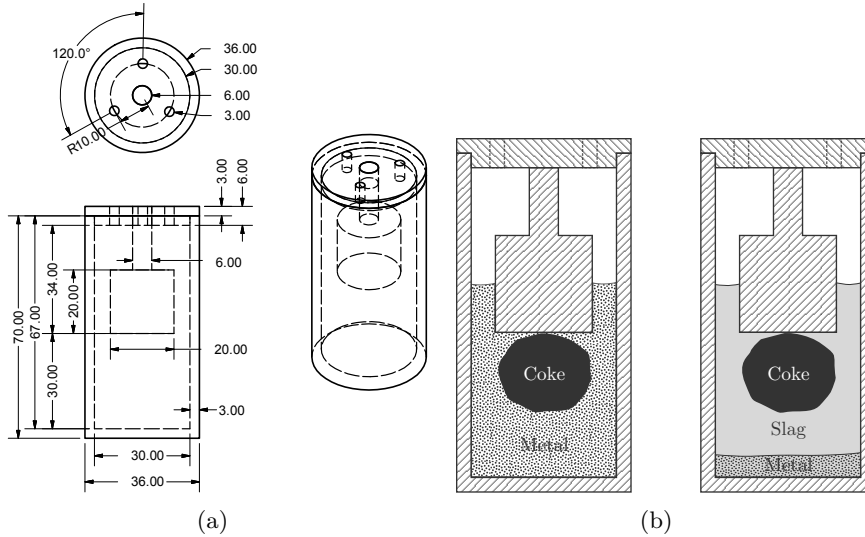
The crucible used for the experiments (a) Technical sketch with crucible dimensions (b) Illustrative drawing of the filled crucible for the metal and slag experiments, respectively.
